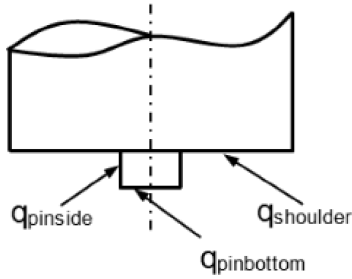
Schematic representation of the FSP tool indicating heat generating surfaces
